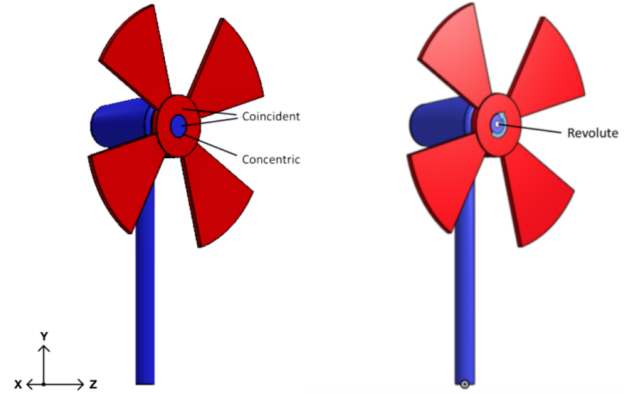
FAN ASSEMBLY MATES IN SOLIDWORKS (LEFT) AND ONSHAPE (RIGHT)
